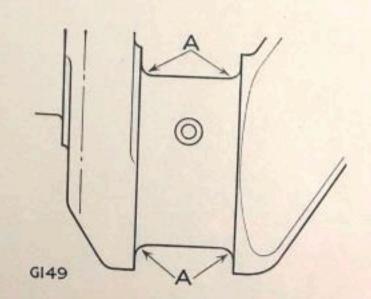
Crankshaft journal correctly reconditioned A-...150 in. (3,8 mm) radius
